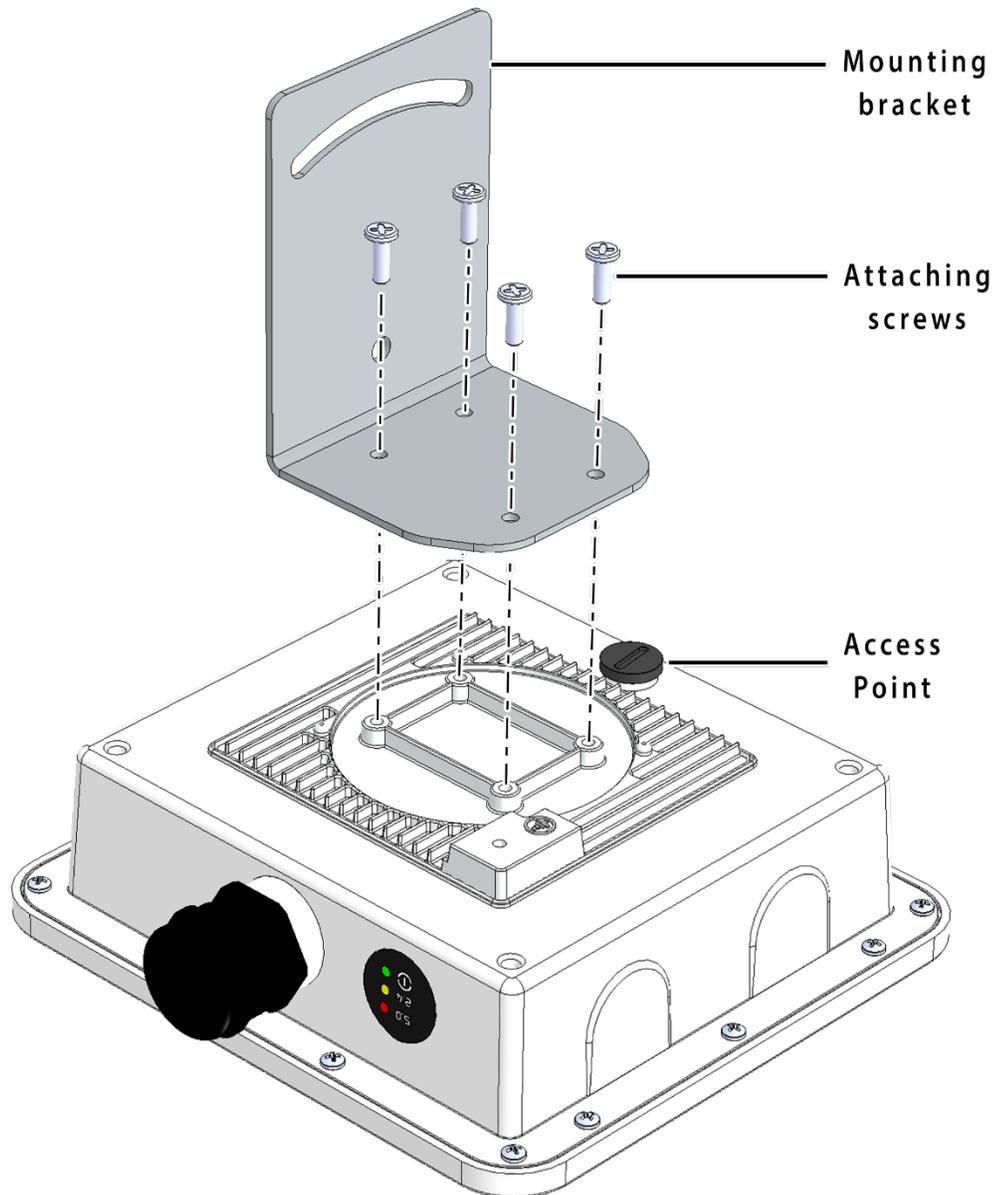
Mounting bracket attachment with the 2x2 outdoor AP
